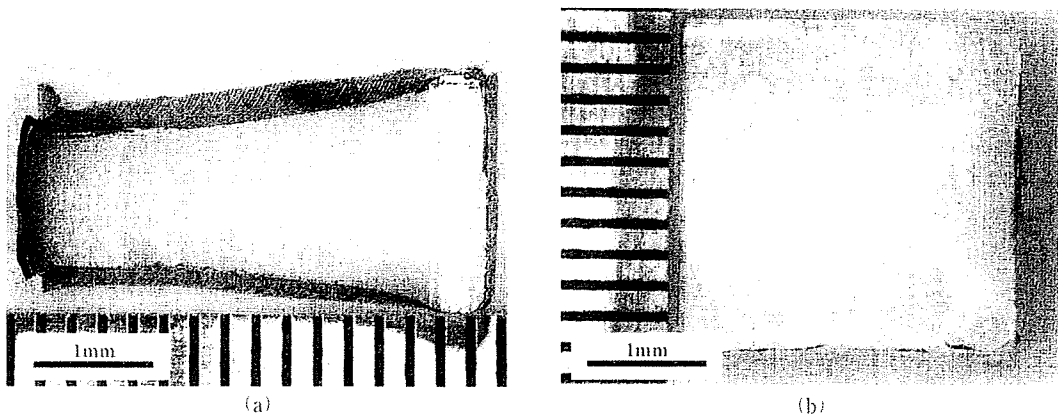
Optical micrographs of fracture surfaces. Crack propagation direction : right to left. (a) Deformed virgin specimen. (b) Retrieved specimen showing little deformation.
